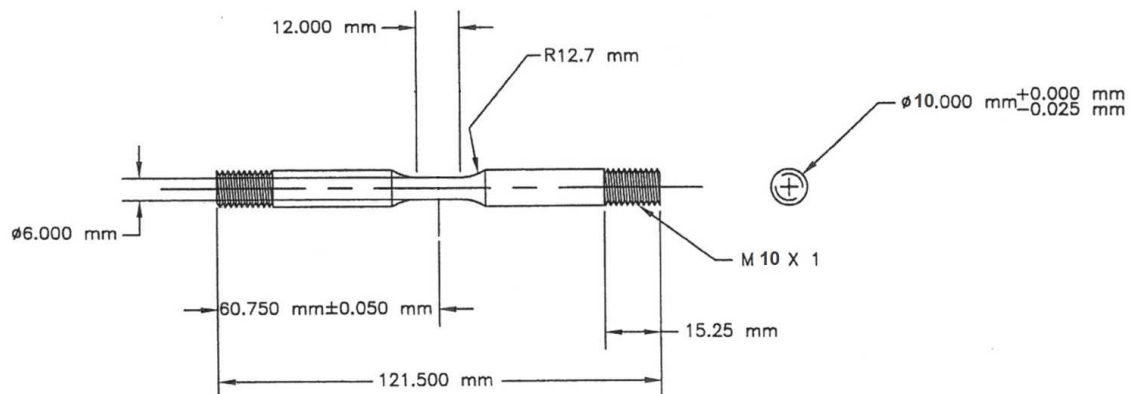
Dimension of uniaxial tensile test specimen
